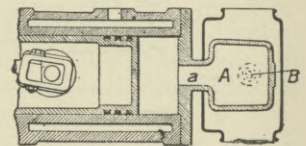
Hornsby-Ackroyd Engine (section through vaporizer and cylinder).
